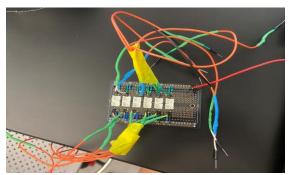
Circuit board used to operate the buttons and joysticks once all parts were confirmed to work. All parts were soldered on. All wires received necessary tubing for cable management.
